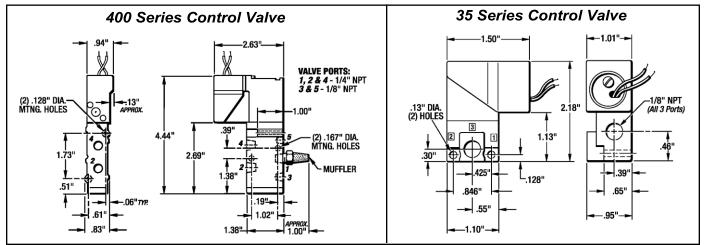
Pneumatic Valve Dimensions For Remote Mounting
